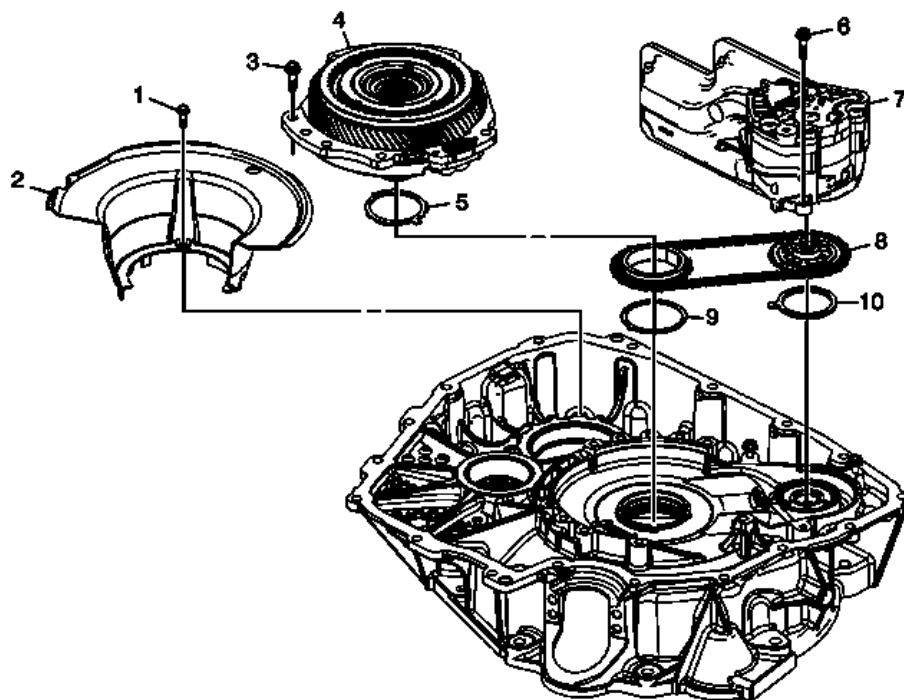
Identifying Torque Converter & Differential Housing Assembly Components
